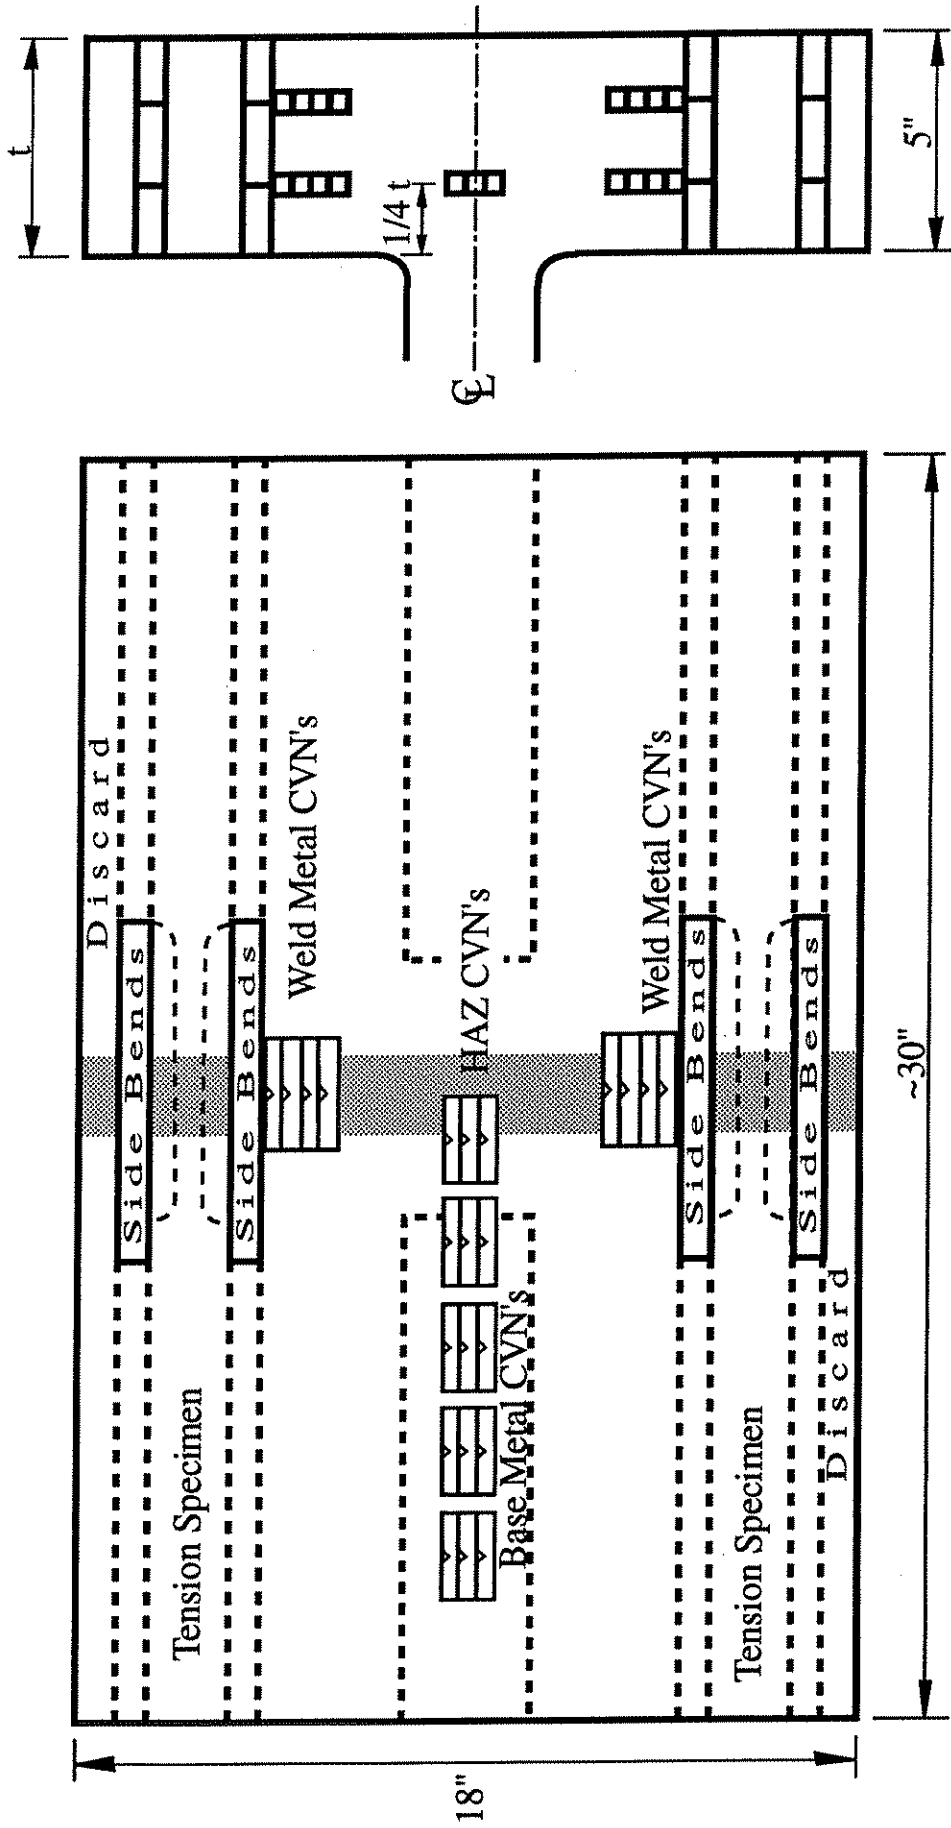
W14 x 730 Flange Splice Test Specimen Layout
